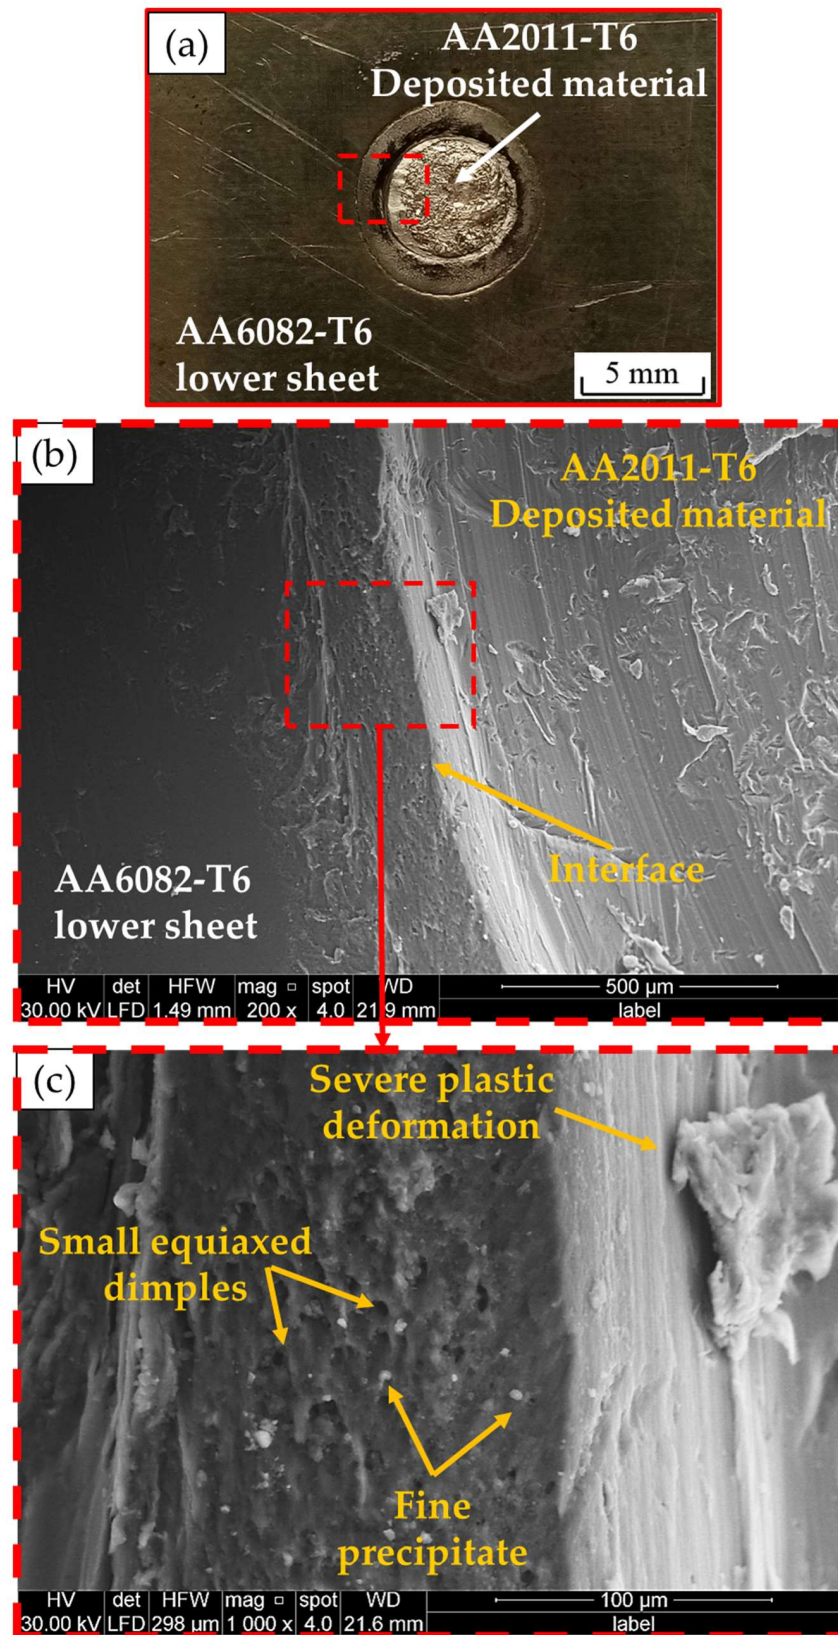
(a) Photograph of the top surface of the lower sheet of AA6082-T6 of the RFSSW joint (welded at 400 rpm and 3 s) after tensile shear testing and (b,c) SEM images of the fracture surface at different magnifications.
